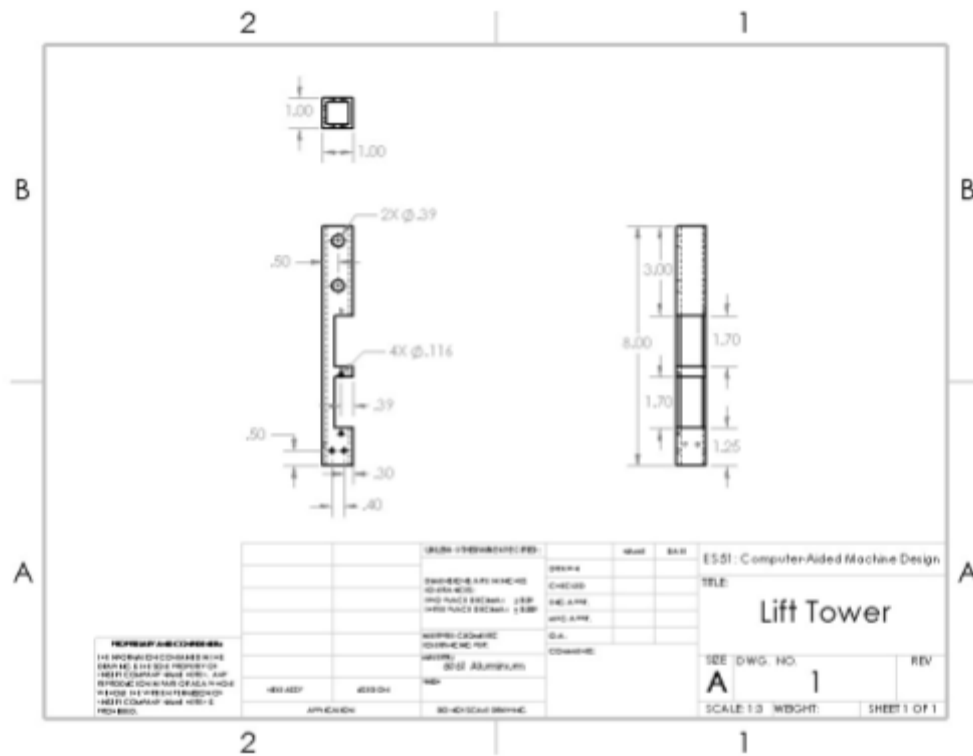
Engineering Drawing of Aluminum Lift Tower
